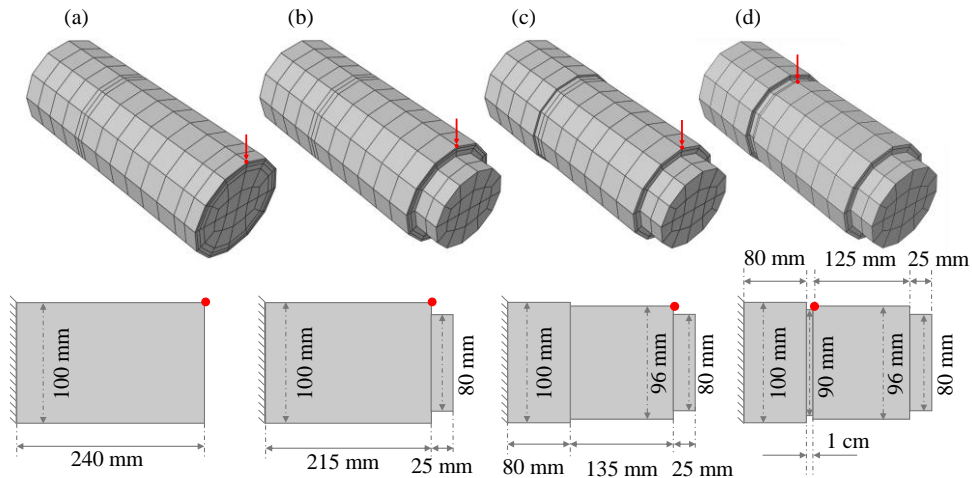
(a) Initial part geometry and FE model, (b) In-process workpiece geometry and FE model at the first step of machining, (c) In-process workpiece geometry and FE model at the second step of machining, (d) In-process workpiece geometry and FE model at the third step of machining
